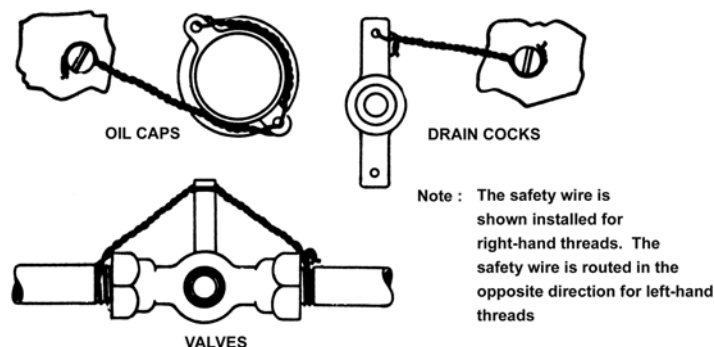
, Safety wiring oil caps, drain cocks, and valves.
